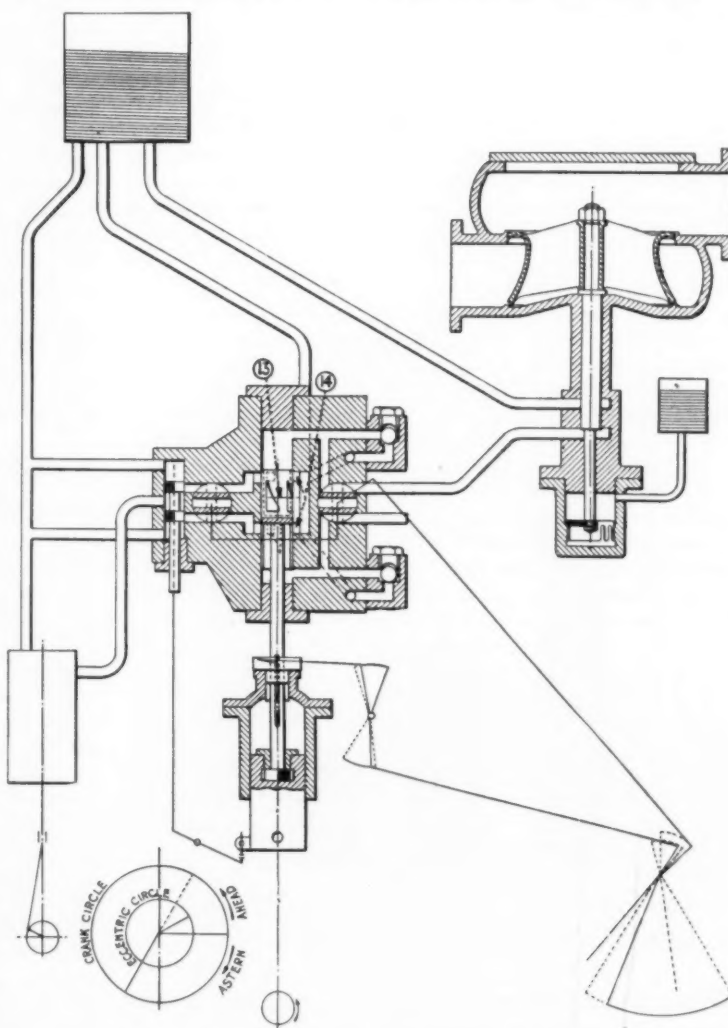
THE MEIER MATTERN HYDRAULIC VALVE GEAR
